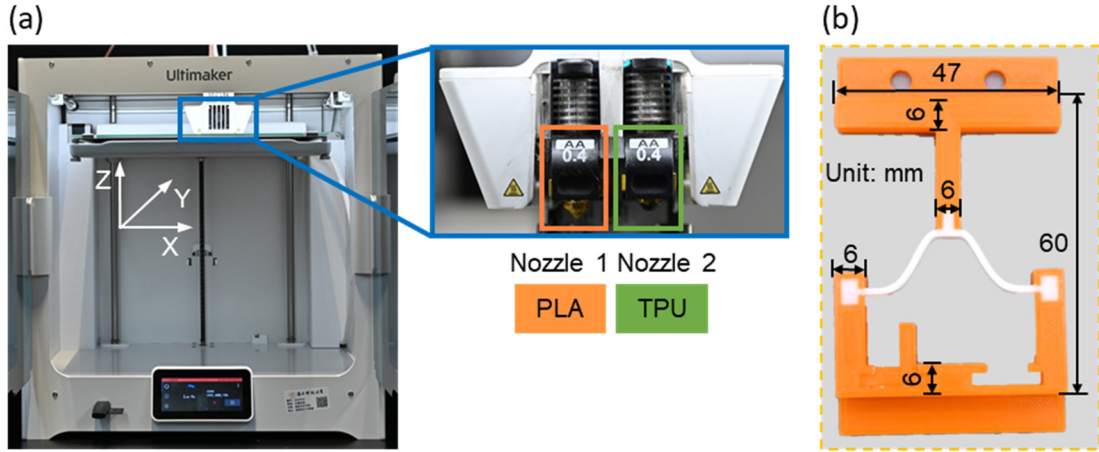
(a) 3D printer for printing samples. (b) Geometrical details of printed samples.
